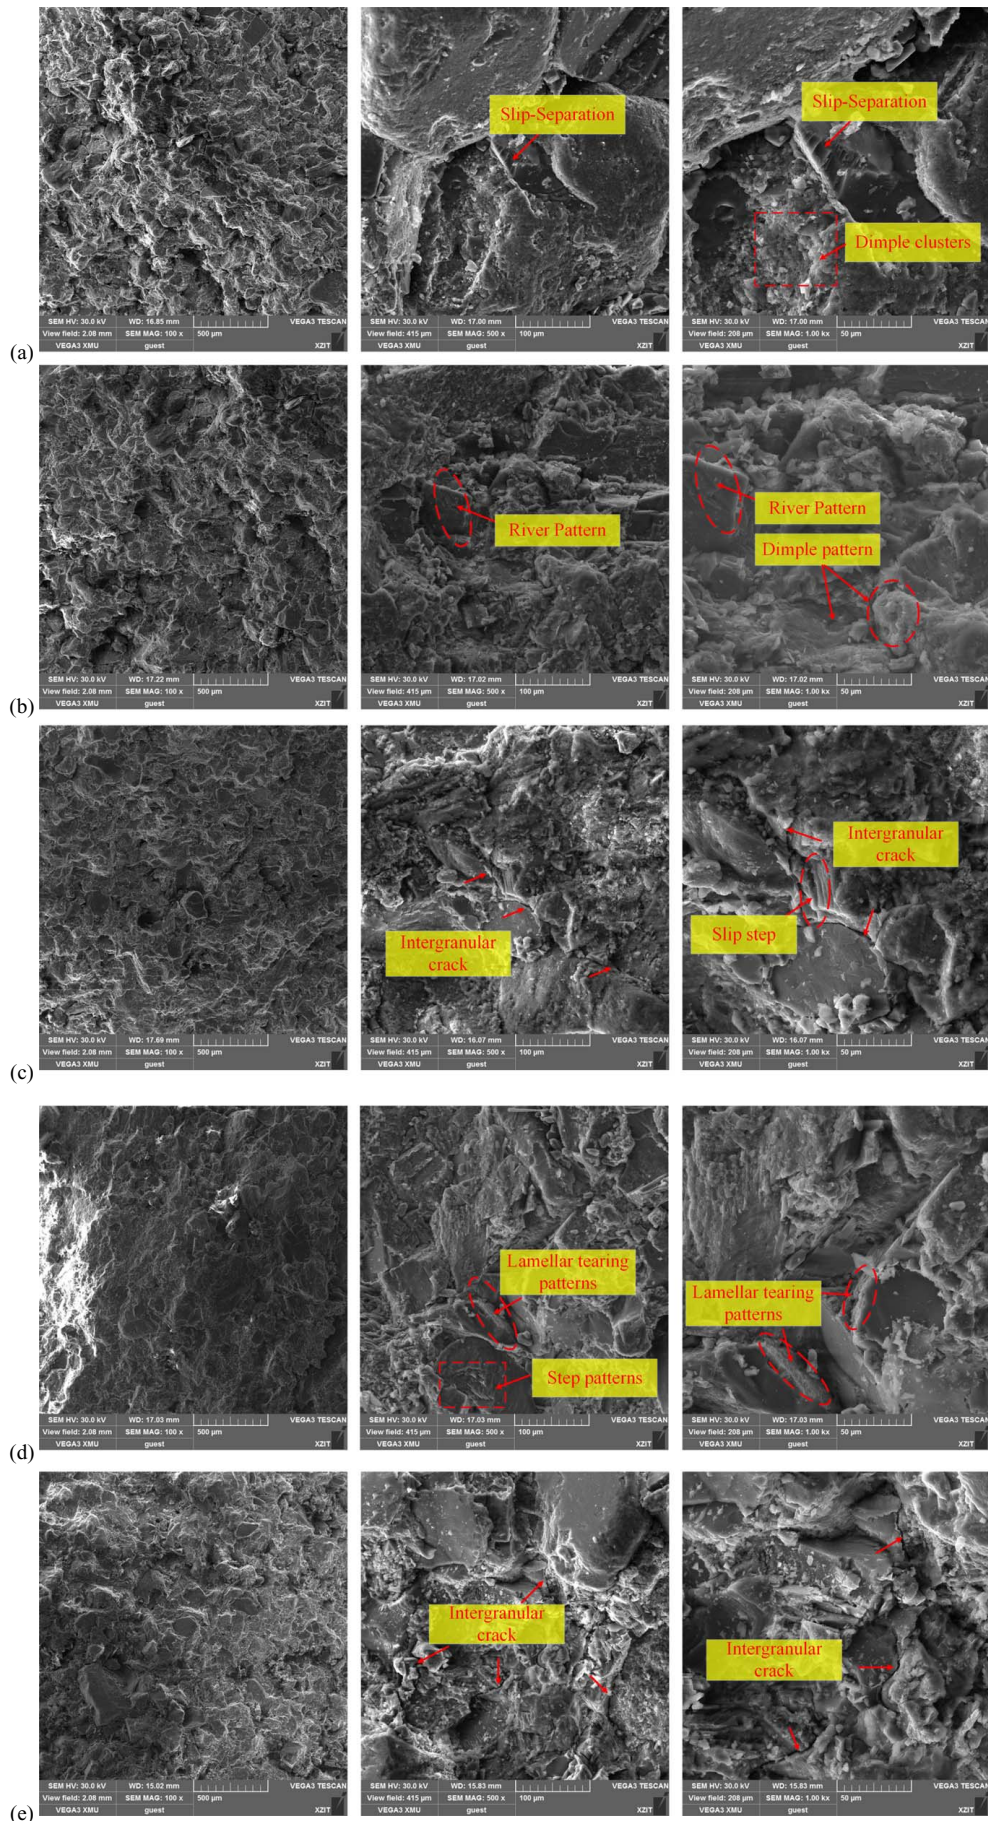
Mesoscopic morphologies of fracture surfaces: (a) normal temperature (25°C); (b) -5°C; (c) -10°C; (d) -20°C; and (e) -30°C.
